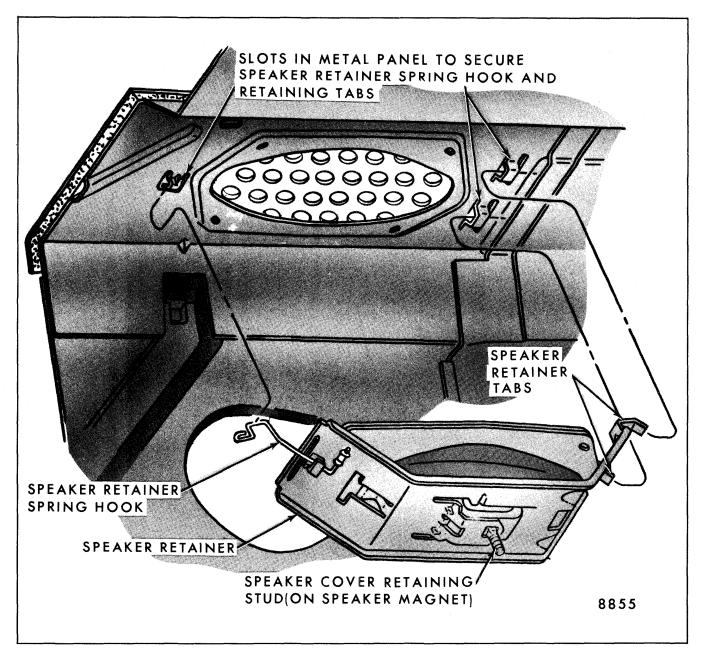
Rear Speaker and Retainer Assembly Installation
